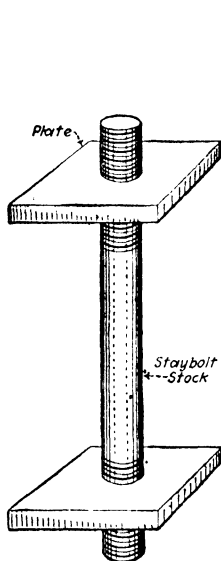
Obsolete method of preparing specimen of stay-bolt stock for tension test.
